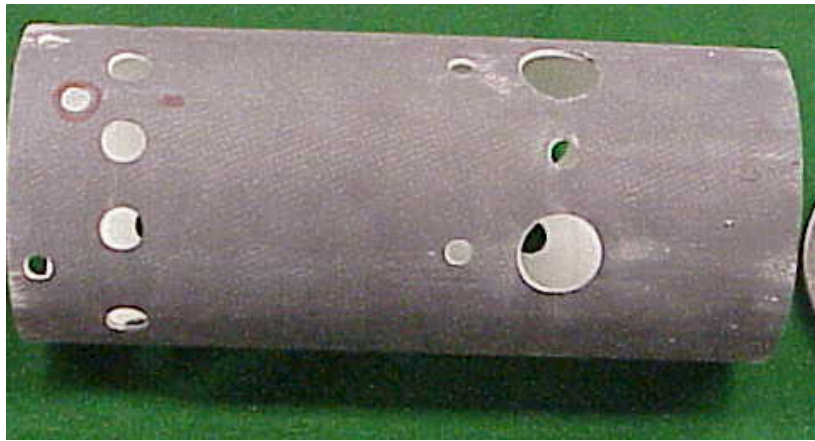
EBC-coated CMC combustor liner for sector-rig test
